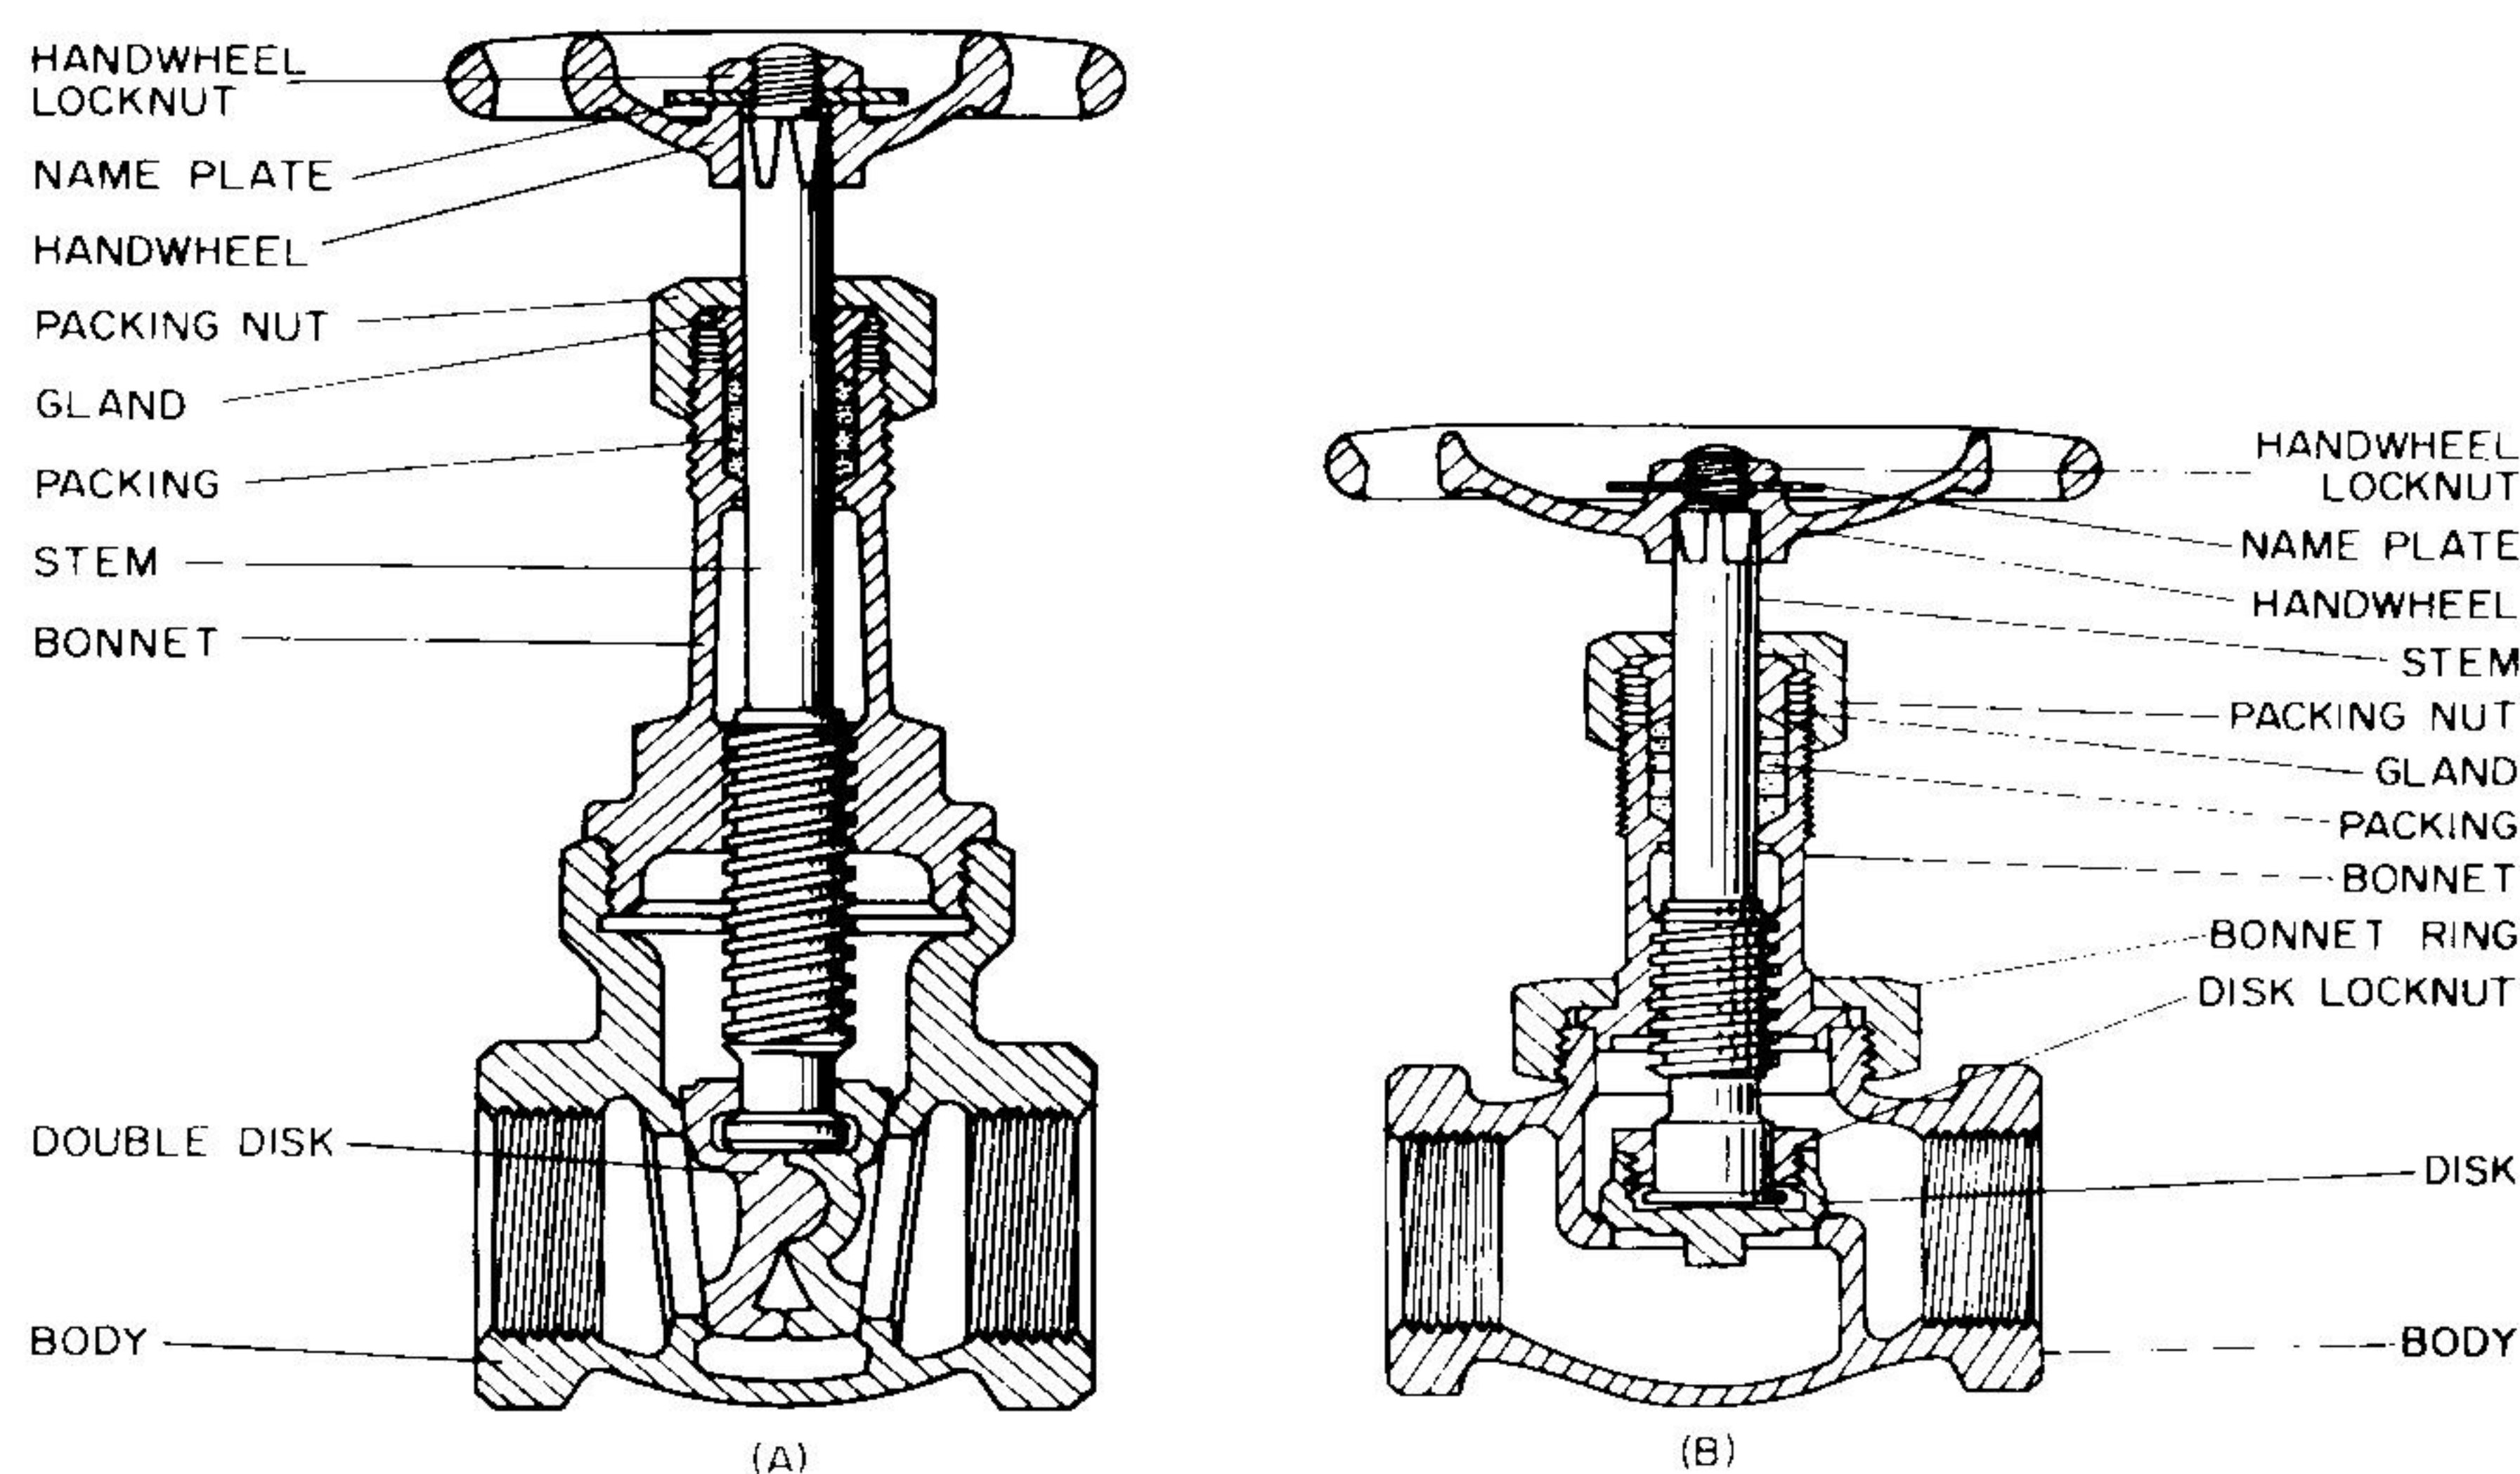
Parts identification. A. Rising-stem, double-wedge valve. B. Union-bonnet regrounding globe valve.
